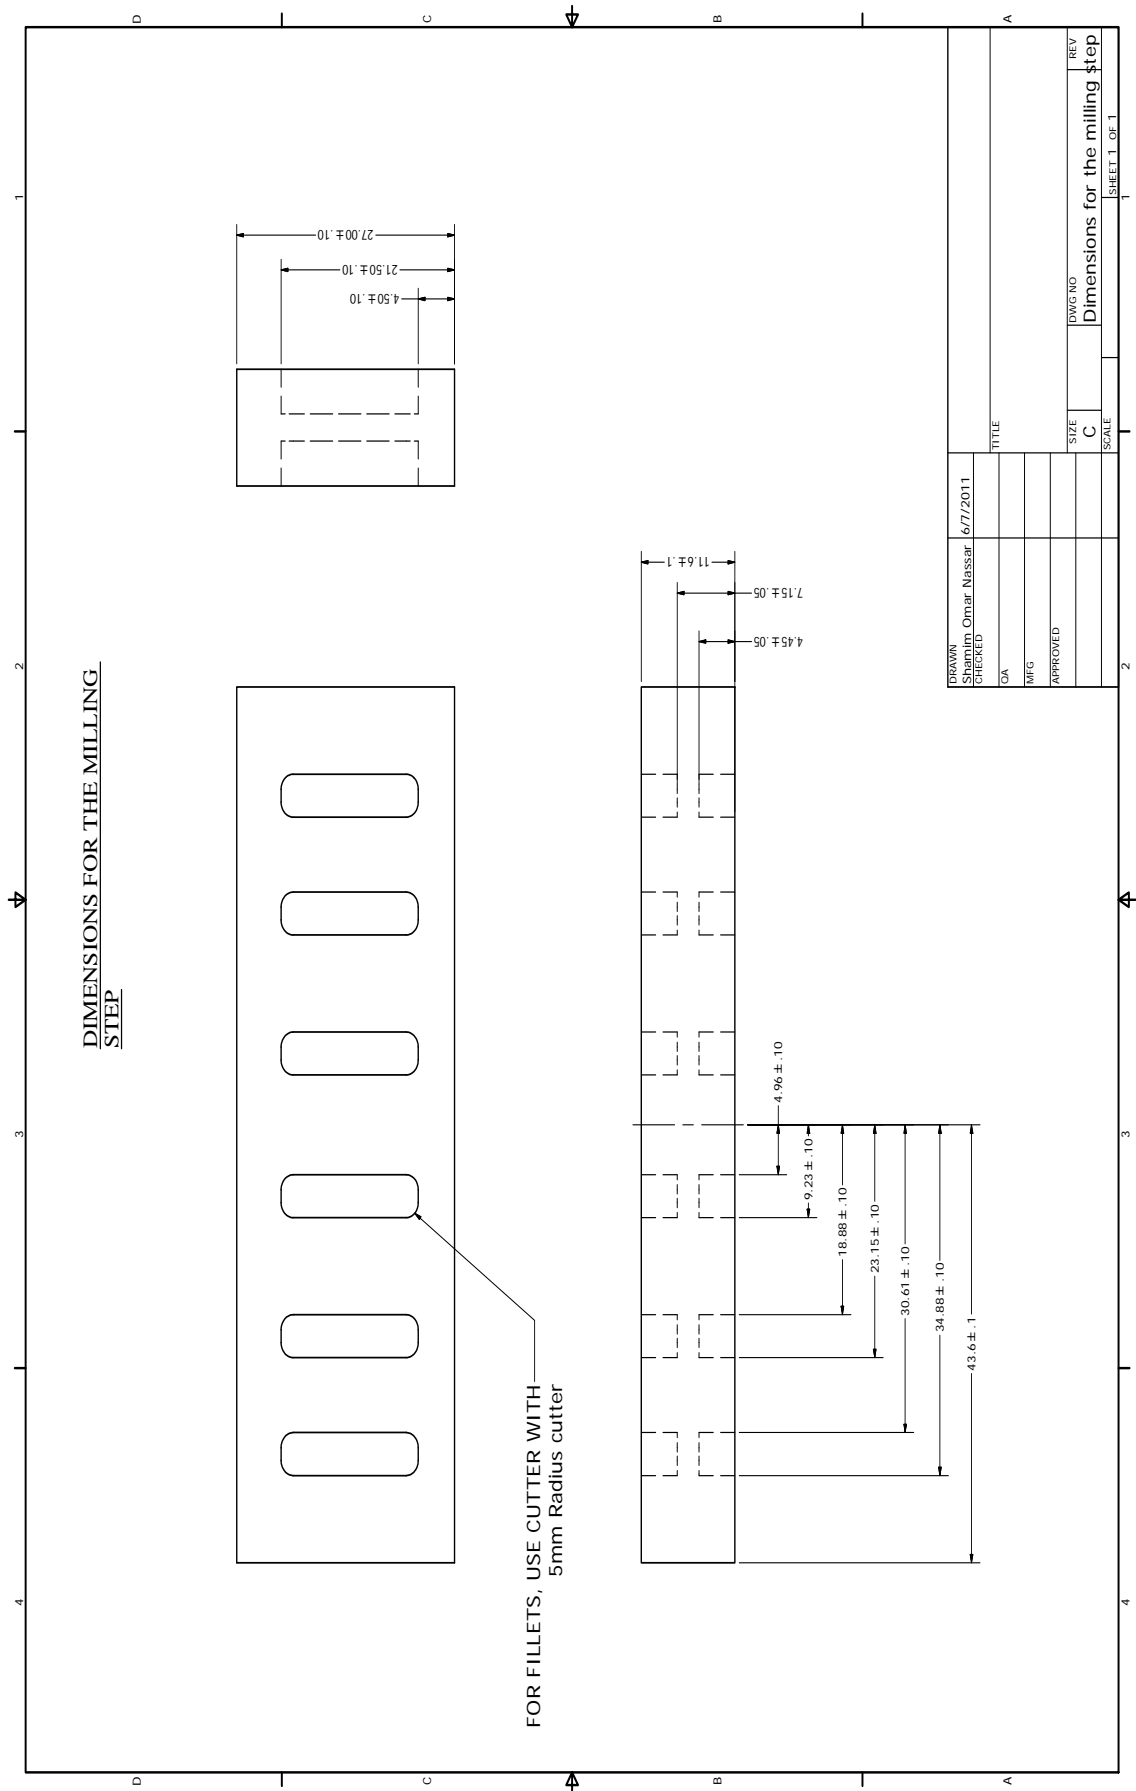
2.125GHz Combine Filter Dimensions for Milling Step
